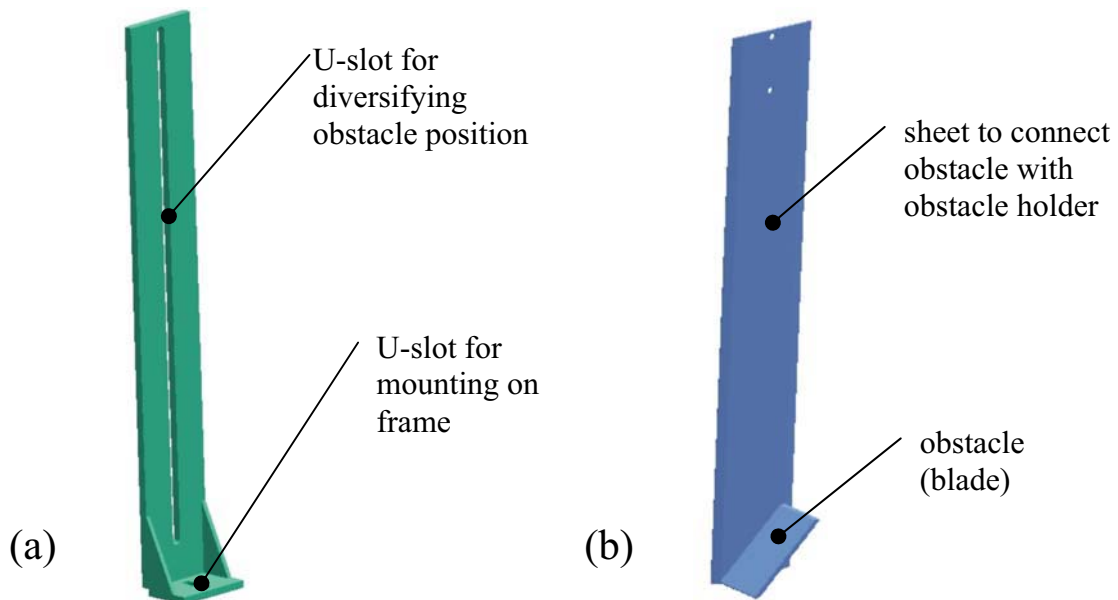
3D model of (a) the obstacle holder and (b) the obstacle (DA04_45°)
